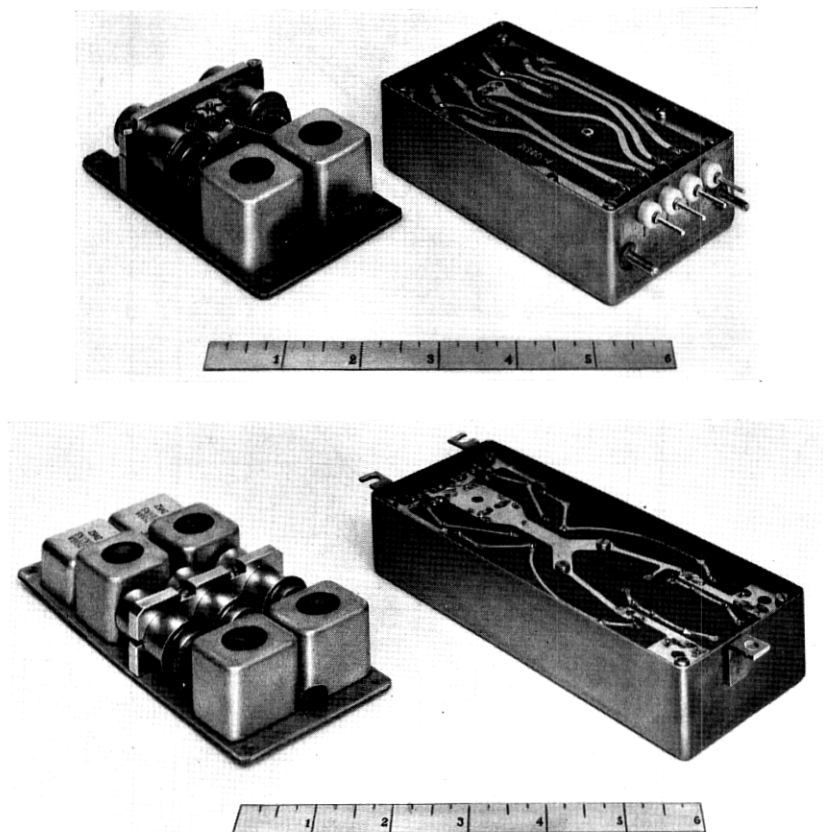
Mechanical construction of the 92-kc bandpass filter (upper photo) and elimination filter (lower photo). Component side of board at left, printed wiring side at right.
